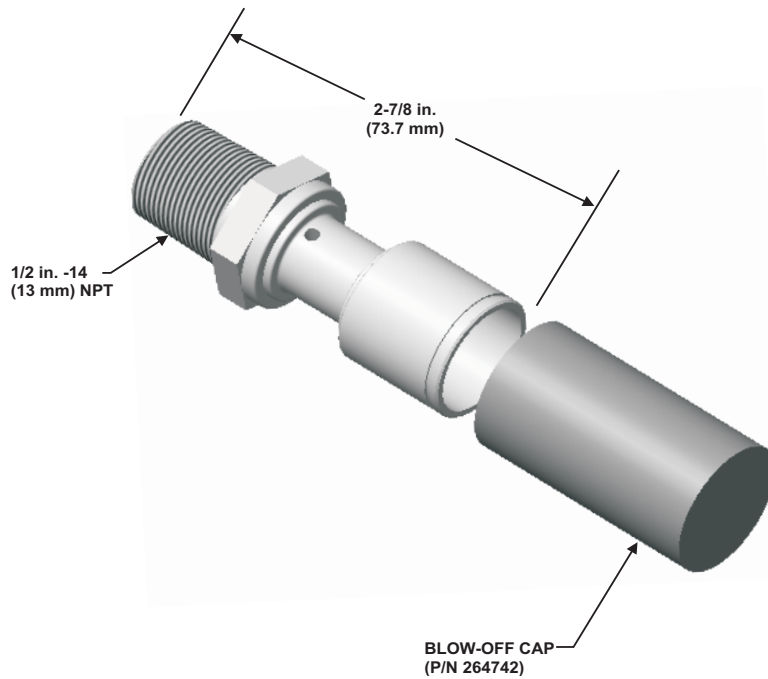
Duct/Plenum (DP) Nozzle, P/N 83-100006-001
